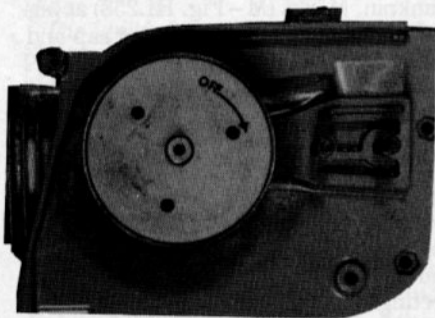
Clutch hub is removed by unscrewing clockwise as indicated on hub. Refer to Fig. HL254.
